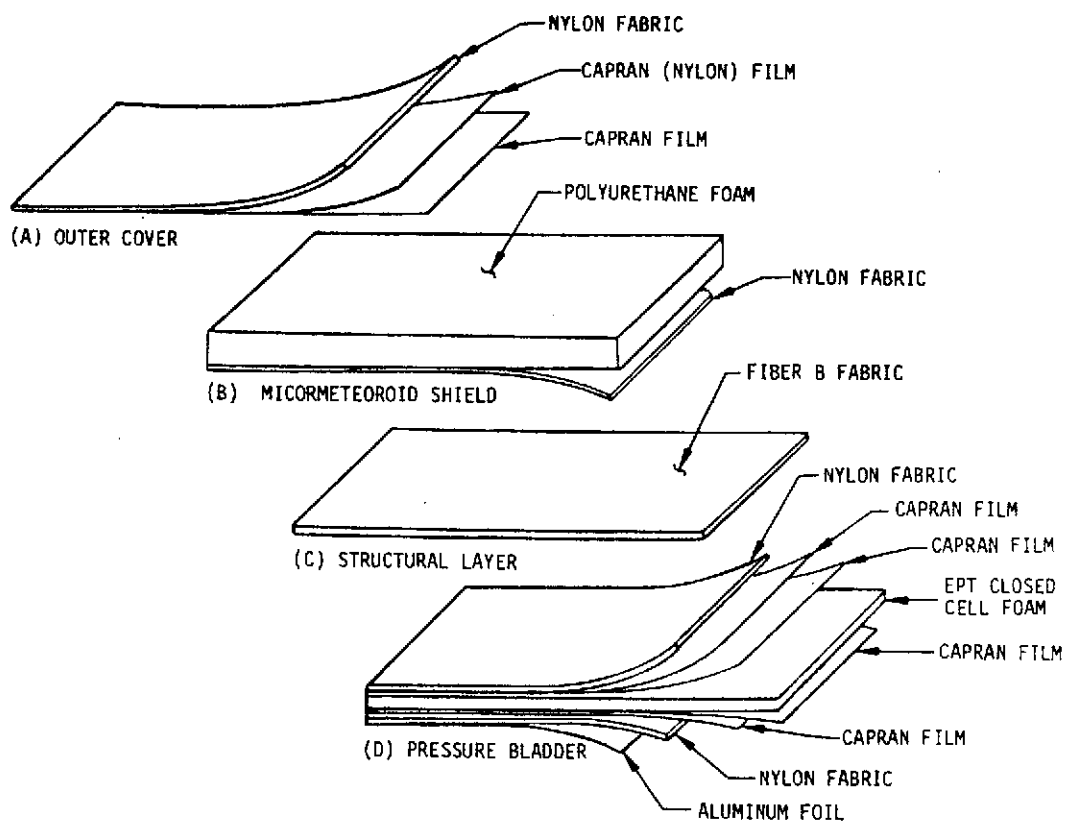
SORTIE LAB FLEXIBLE TUNNEL SCHEMATIC OF TUNNEL WALL MATERIALS
